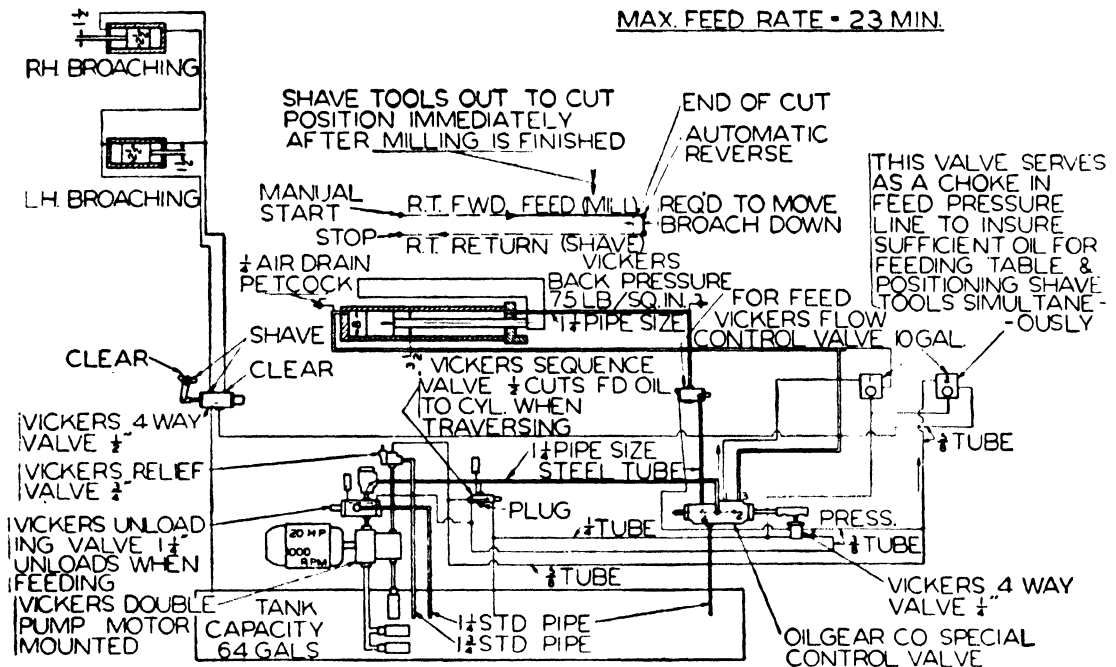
Hydraulic circuit of Newton milling and shaving machine. (*The Consolidated Machine Tool Corp., Newton Machine Tool Works, Rochester, N.Y.*)
